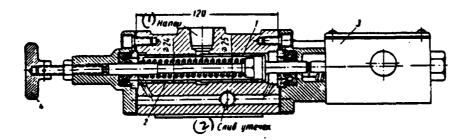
Pressure relays with the stepped valve on the pressure 220 kg/cm² for the work on oil: 1 - valve; 2 - spring; 3 - terminal switch; 4 - adjusting wheel of pressure.
